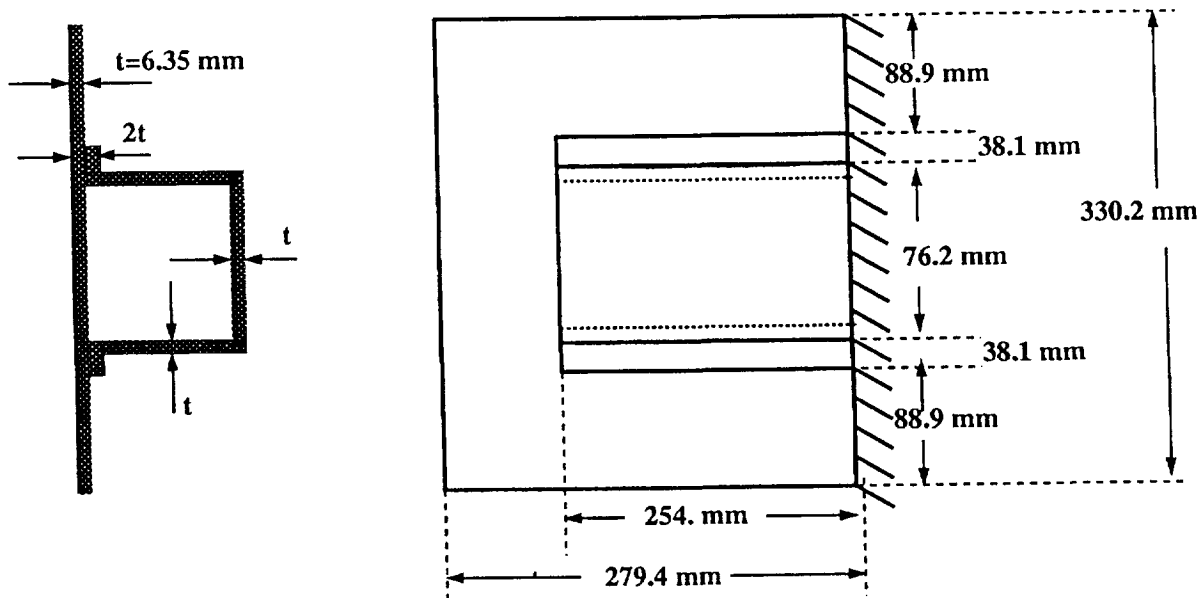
Stiffened Composite Panel; AS-4/HMHS $[[0/\pm 45/90]_s]_6$; Cross Section and Plan (All dimensions are in mm)
